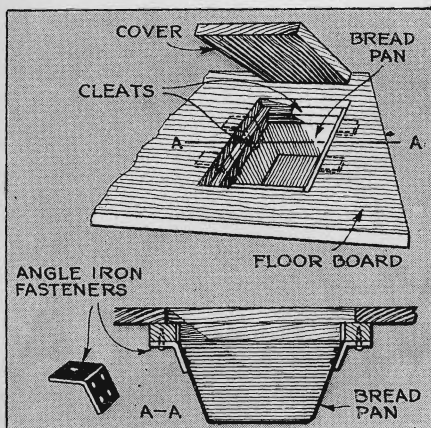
How to construct an ingenious and simple floor board tool box from an ordinary bread pan.
